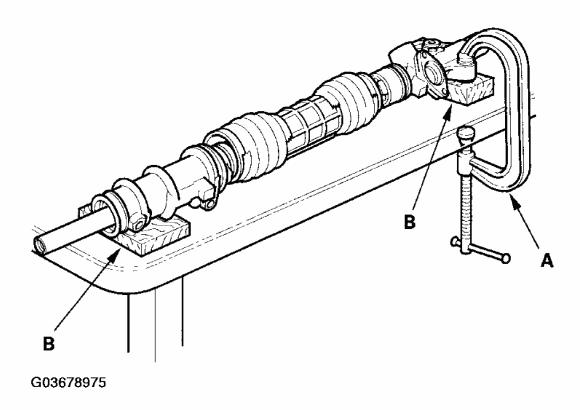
Holding Gearbox Housing Using C-Clamp And Wooden Blocks Courtesy of AMERICAN HONDA MOTOR CO., INC.
